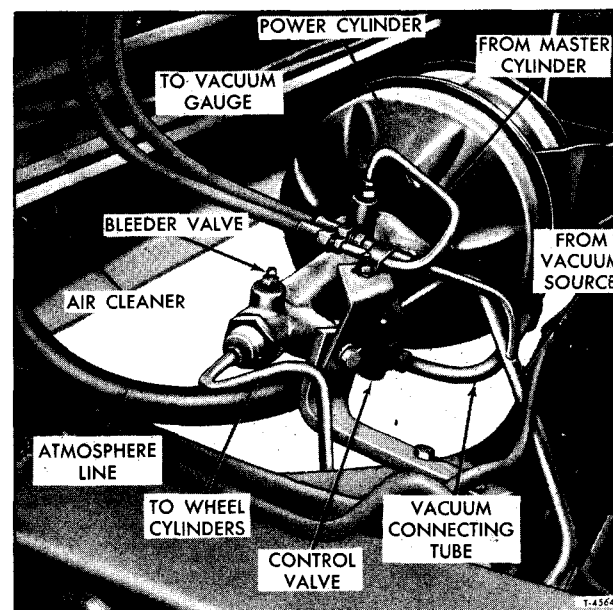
Power Cylinder Installed (Tilt Cab Models)
